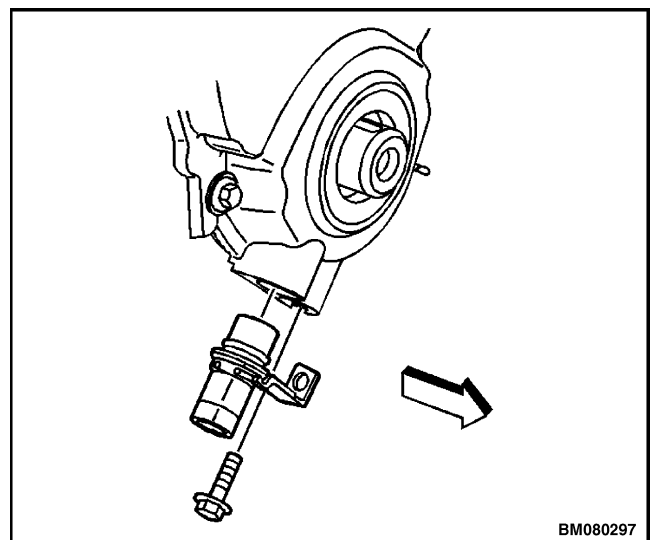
Crankshaft Position (CKP) Sensor Remove/Install
